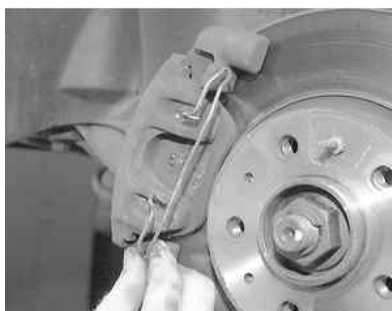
Remove the protective caps over the caliper guide pins . . .
